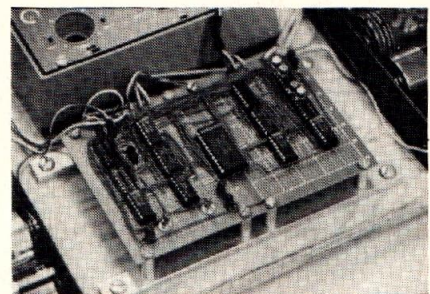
THE COMPLETED INTERFACE. Universal PC boards were used. Note how the transistors are mounted in IC sockets.
